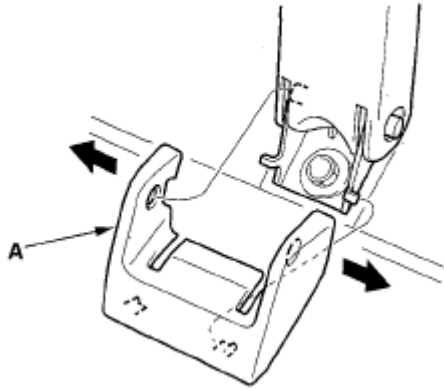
Identifying Front Mounting Bolt Covers And Front Links
